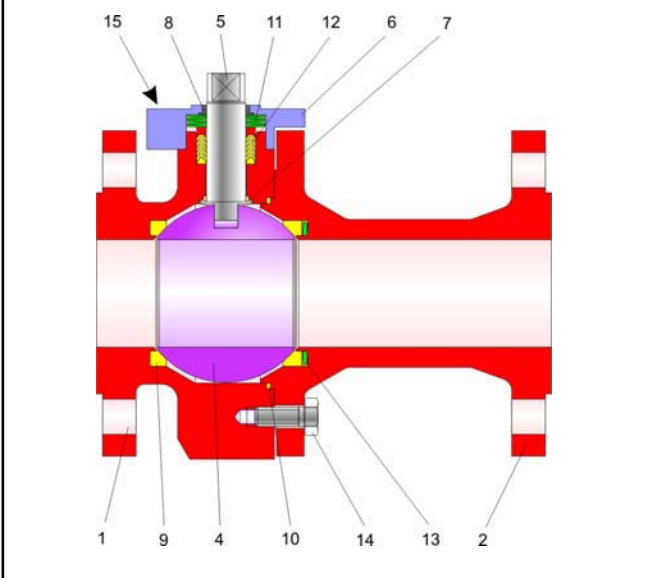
Sectional drawing of a flange ball valve Series 28y
